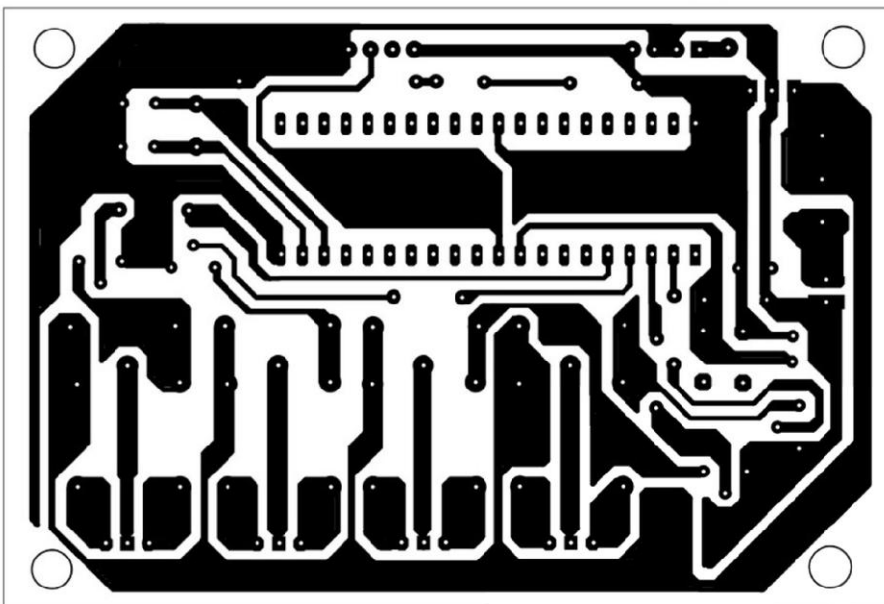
An actual-size, single-side PCB of the receiver circuit
